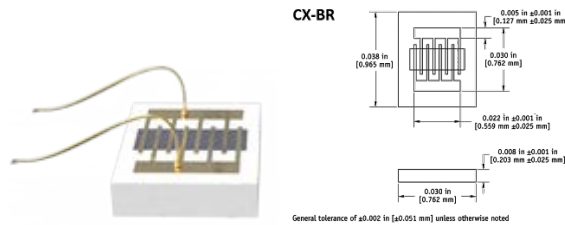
Lakeshore Cernox bare chip packaging and dimensions
